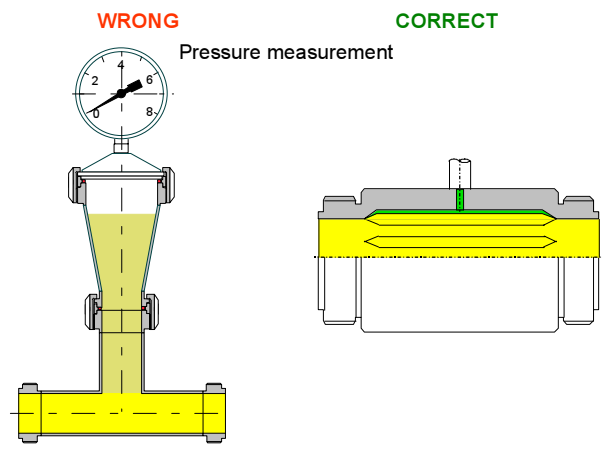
Two methods for mounting a pressure measuring device in a pipe.
